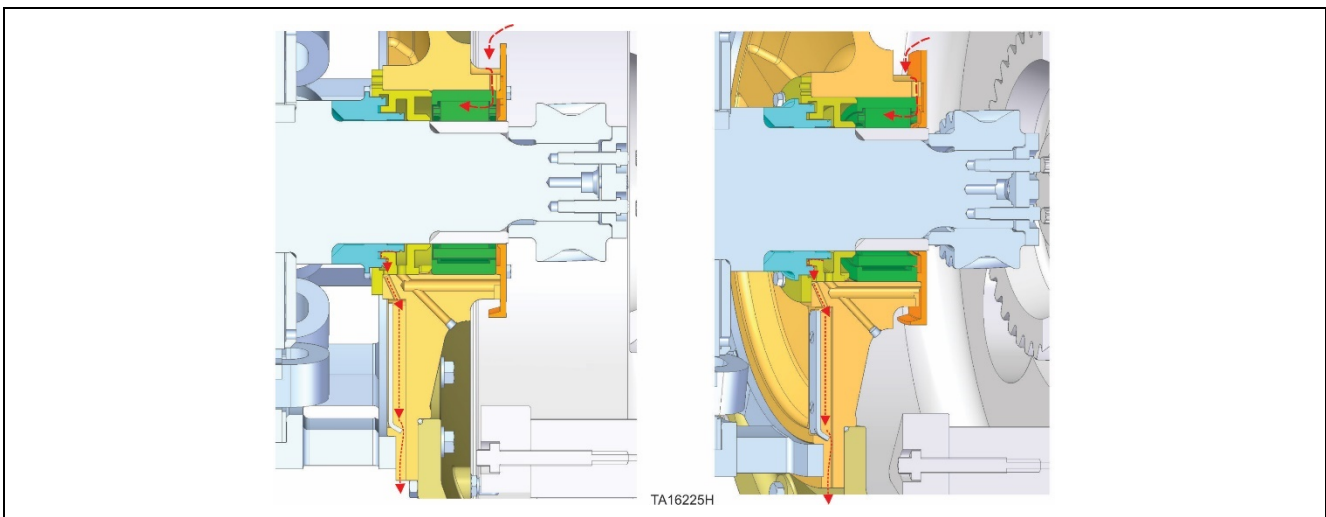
Defective filtration pump (45 planetary drive shown)
